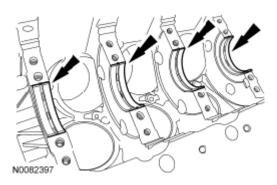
Locating Crankshaft Main Bearings Courtesy of FORD MOTOR CO.
